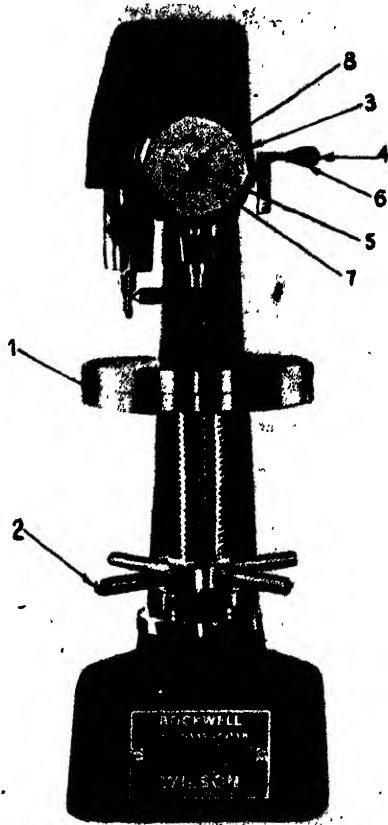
ILLUSTRATING COMPONENTS OF ROCKWELL MACHINE USED IN MAKING A HARDNESS TEST
